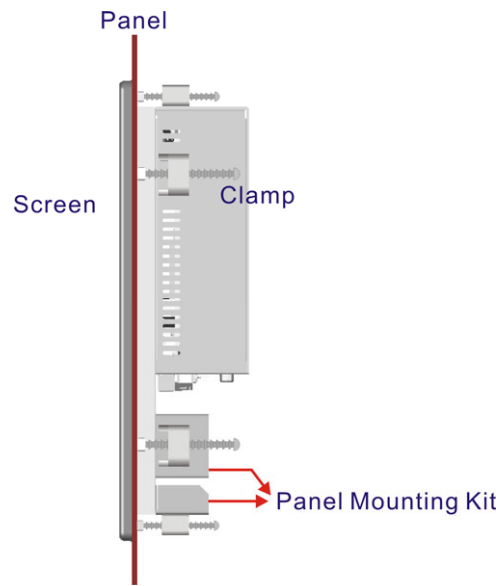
Tighten the Panel Mounting Clamp Screws
